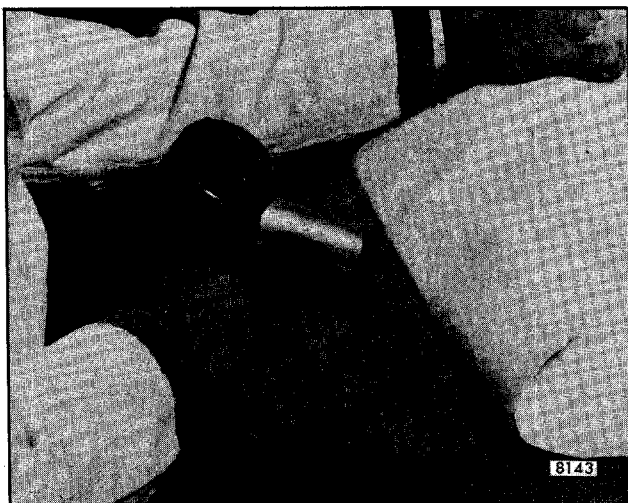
Separating Wrinkled Area from Roof Panel - Heat Application
